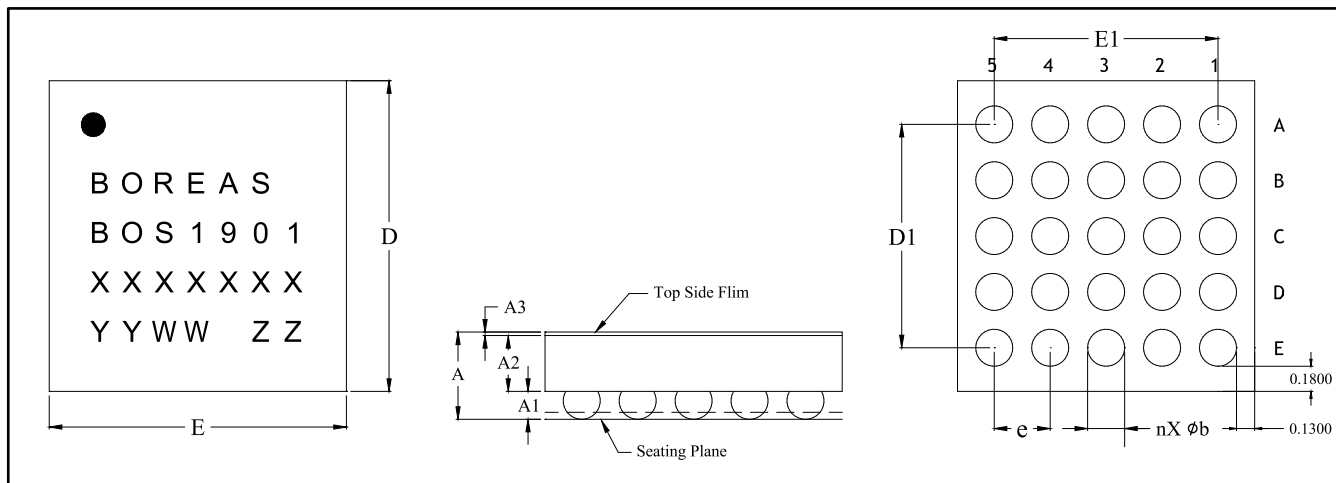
WLCSP 25B 2.1mm x 2.2mm package outline drawing
